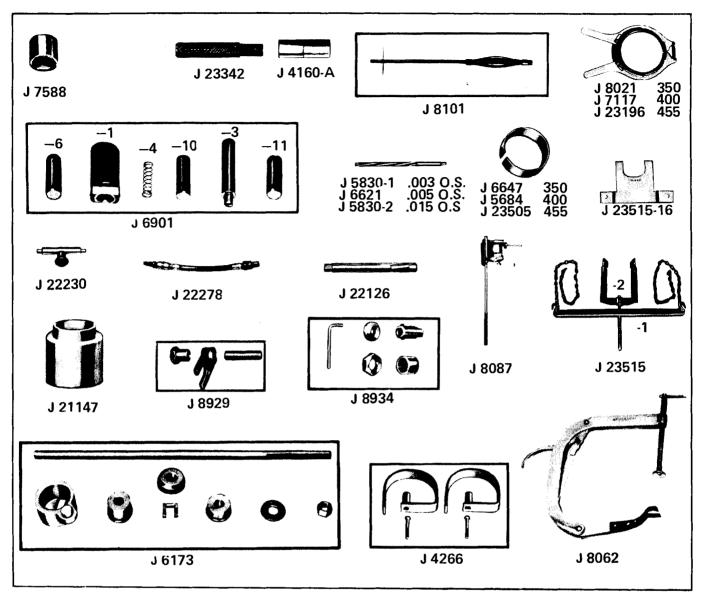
Special Tools (V-8) - All Except 307 Engine
